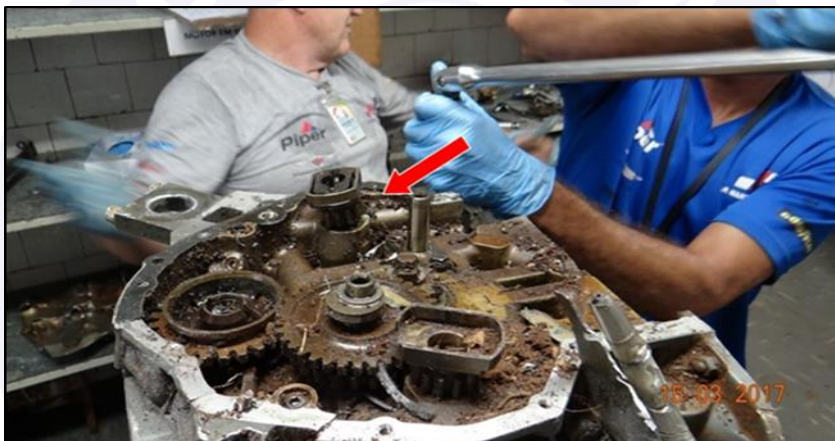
Gears of the accessory box. The arrow indicates misalignment of the drive gear of the right magneto.
